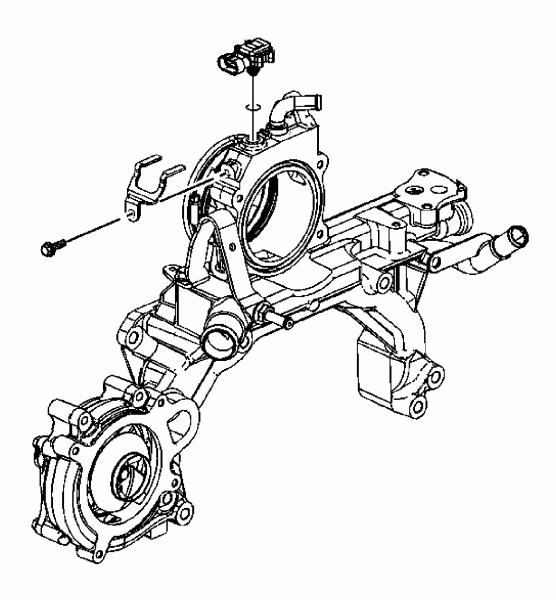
Identifying MAP Sensor Bracket & Bolt Courtesy of GENERAL MOTORS CORP.
